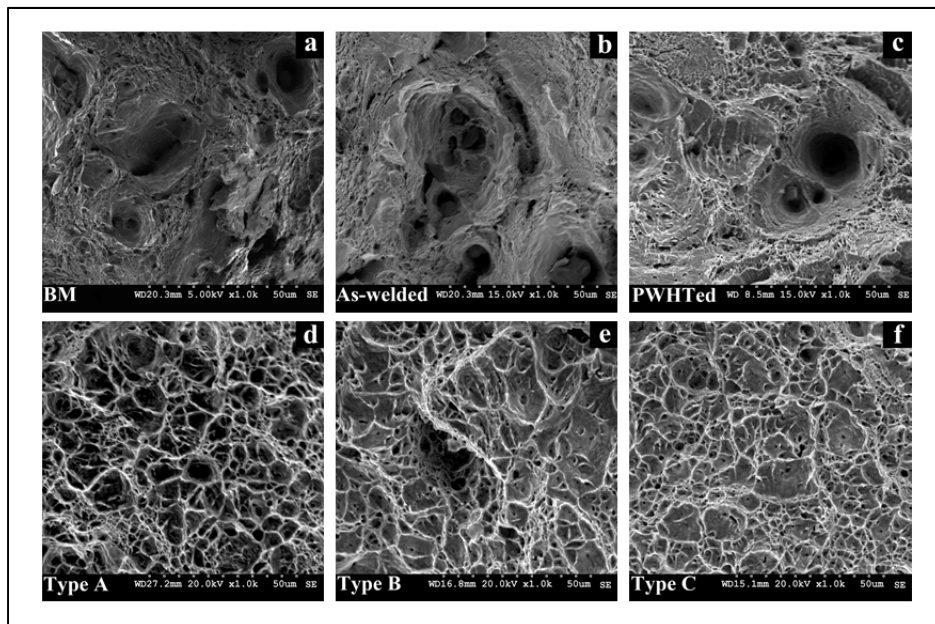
SEI of the tensile fracture surfaces for the: (a) BM, (b) As-welded, (c) PWHTed, (d) Type A, (e) Type B, and (f) Type C samples
